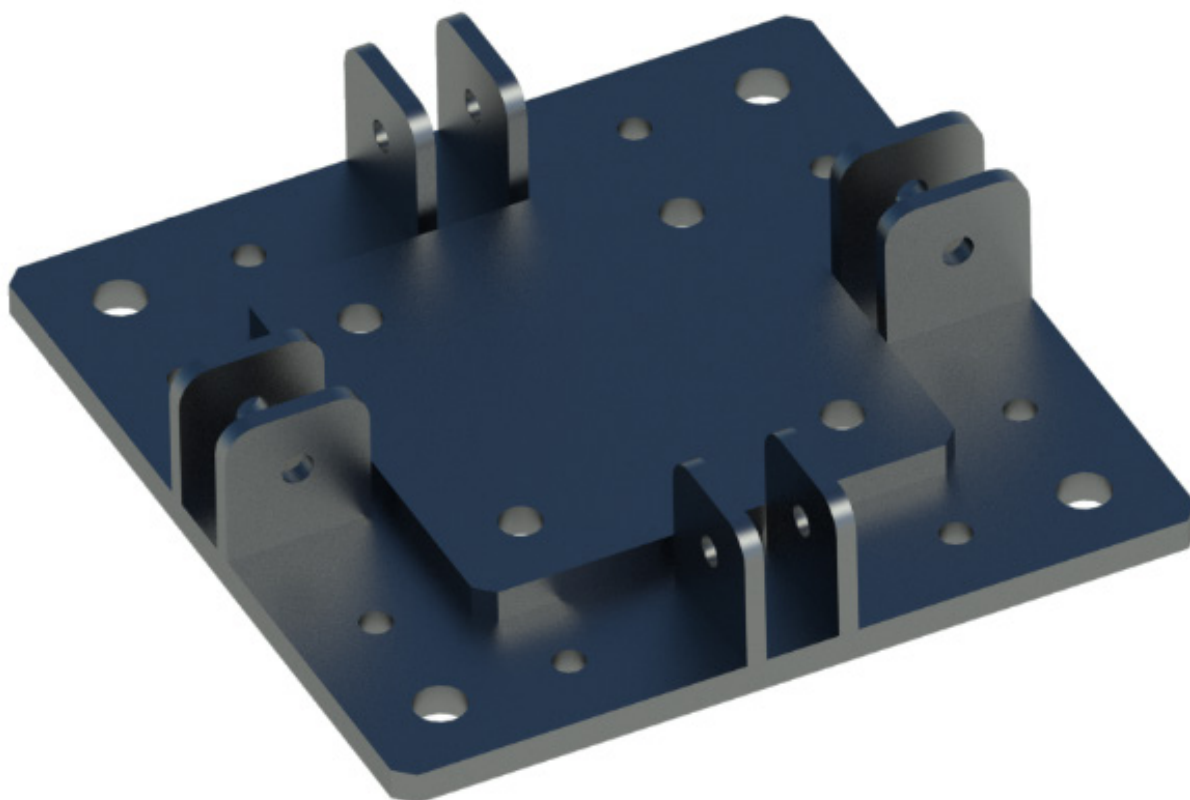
DETAILED VIEW OF BOLT CONNECTION USING SOLDIER ADAPTER SLIM-MAX SOLDIER TO POWERSHORE 150 PROP LIP
